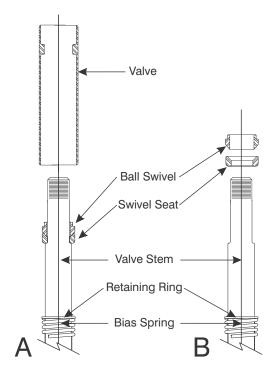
Remove the Valve, Lower Ball Swivel, and Seat from the Valve Stem.
